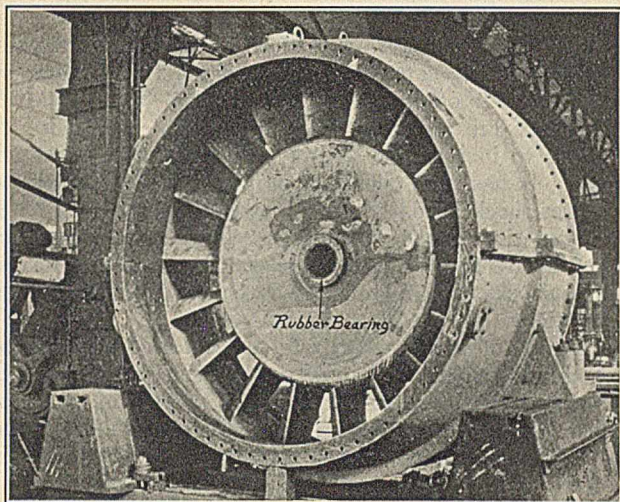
Rubber Bearing for 9-Inch Shaft Installed in 110-Inch Screw Pump Built for City of New Orleans, La.
